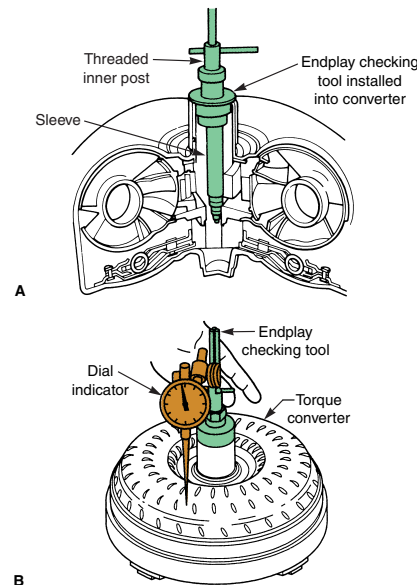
Converter endplay can be checked with the special tool shown here. A—The endplay-checking tool must be fully seated on the converter hub and locked in place. B—After mounting the dial indicator on the tool, zero the indicator and pull up on the tool's handles. The reading obtained is the total endplay of the turbine and stator. (Ford)
